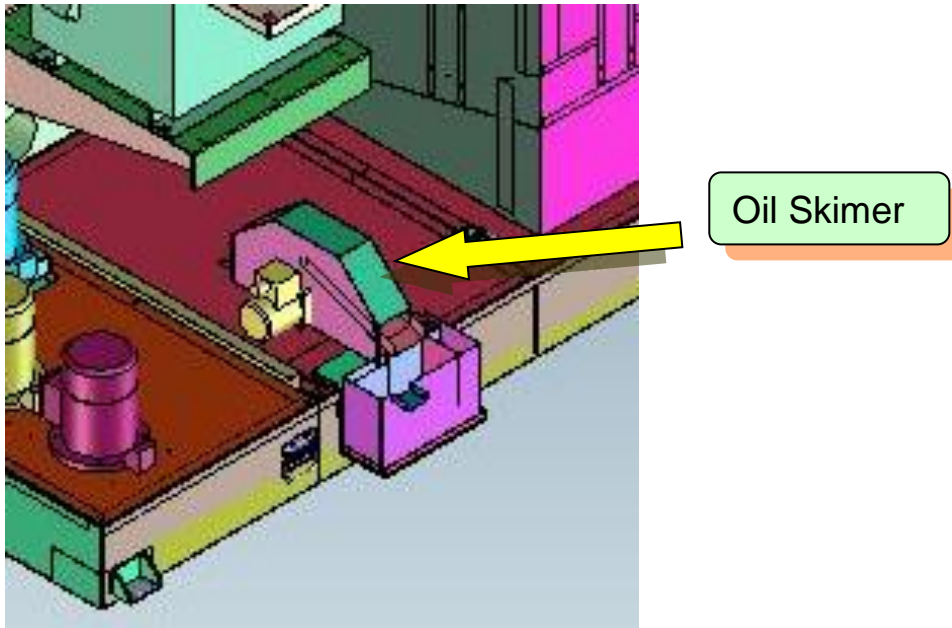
OIL SKIMER & OIL LEVEL INDICATOR
